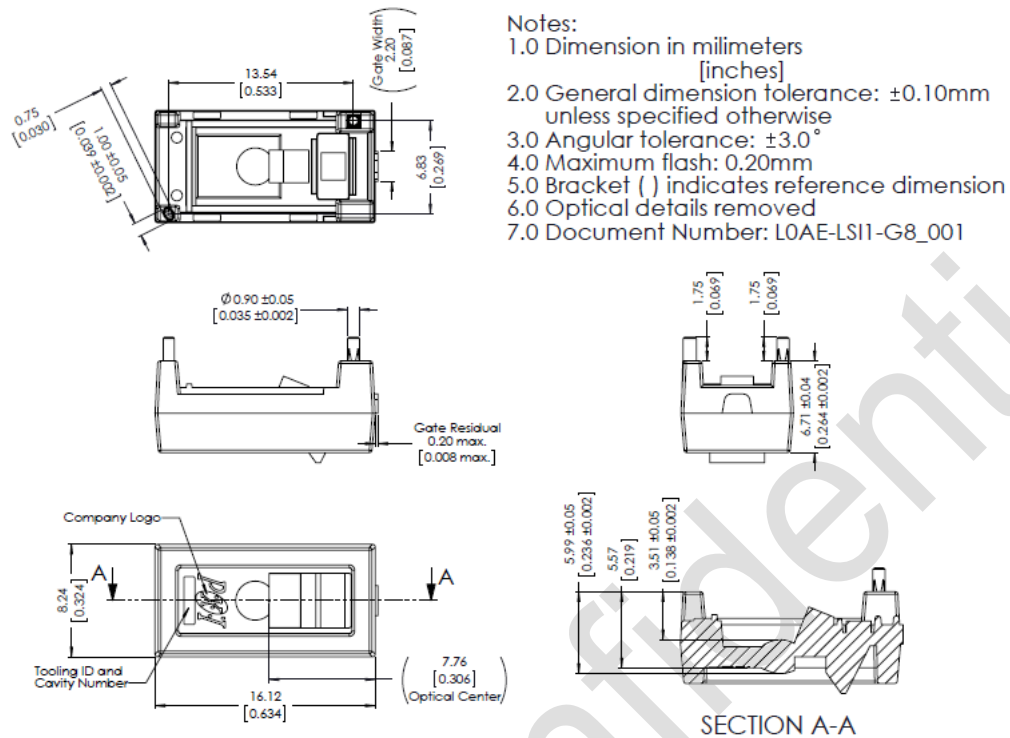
LOAE-LSI1 trim lens outline drawing and detail
